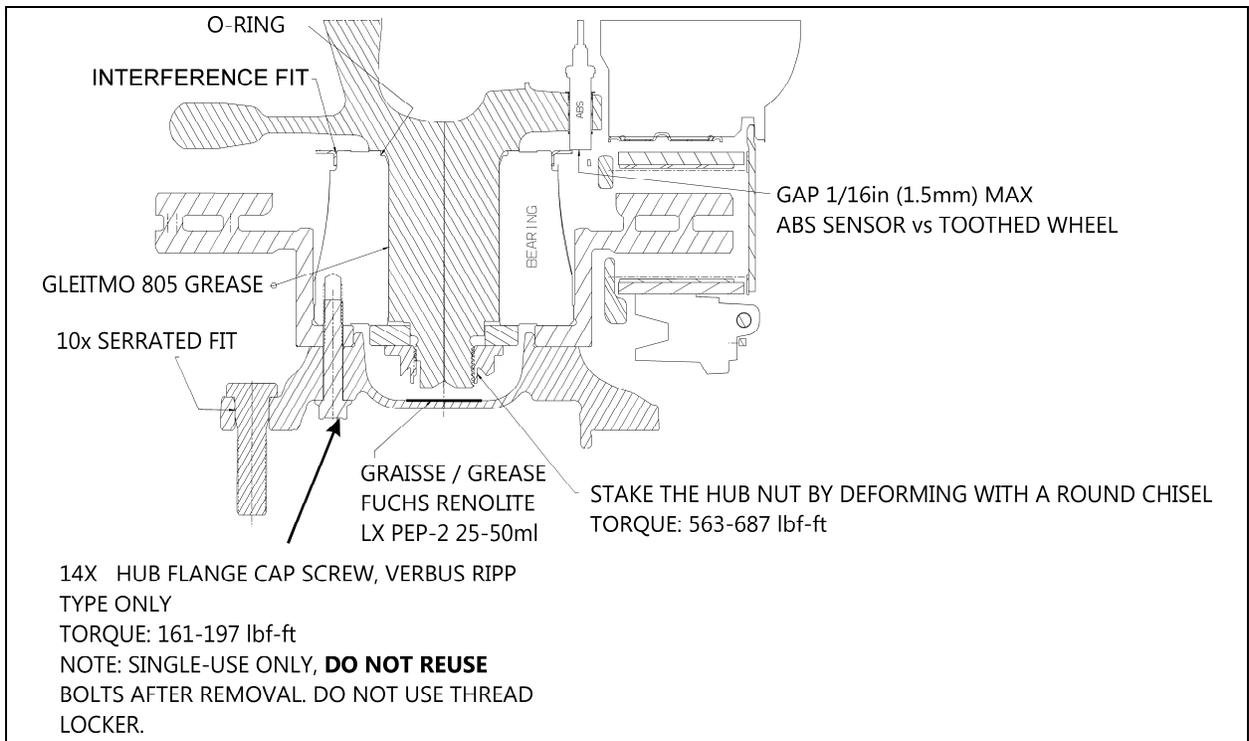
TAG AXLE UNITIZED BEARING & WHEEL HUB
